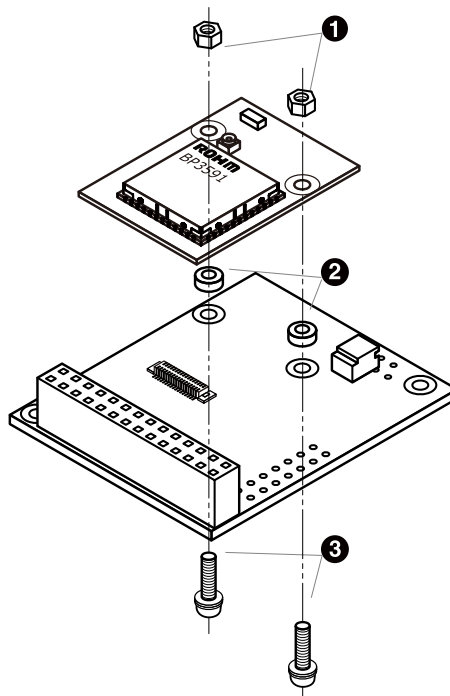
AWL13 and WLAN Interface Board (AWL13 Compatible) Assembly Diagram
